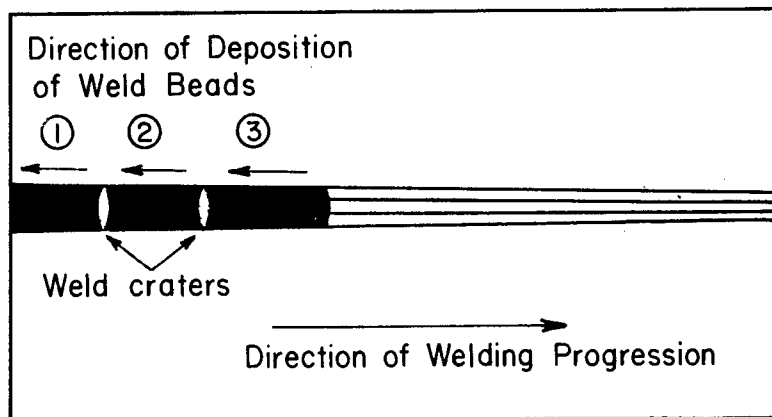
"BACKSTEP" WELDING TECHNIQUE
